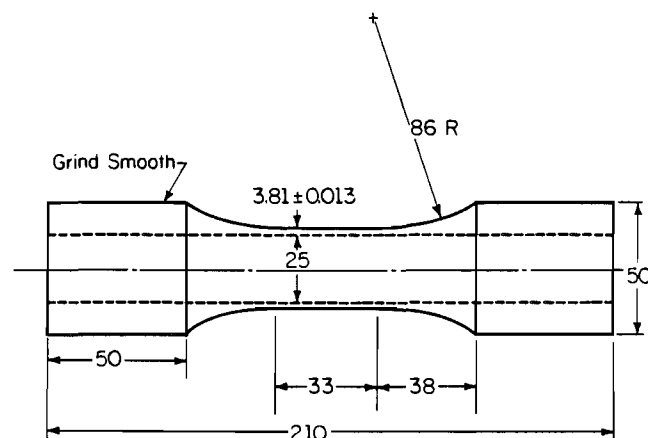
Tubular axial-torsional specimen (dimensions in mm)
